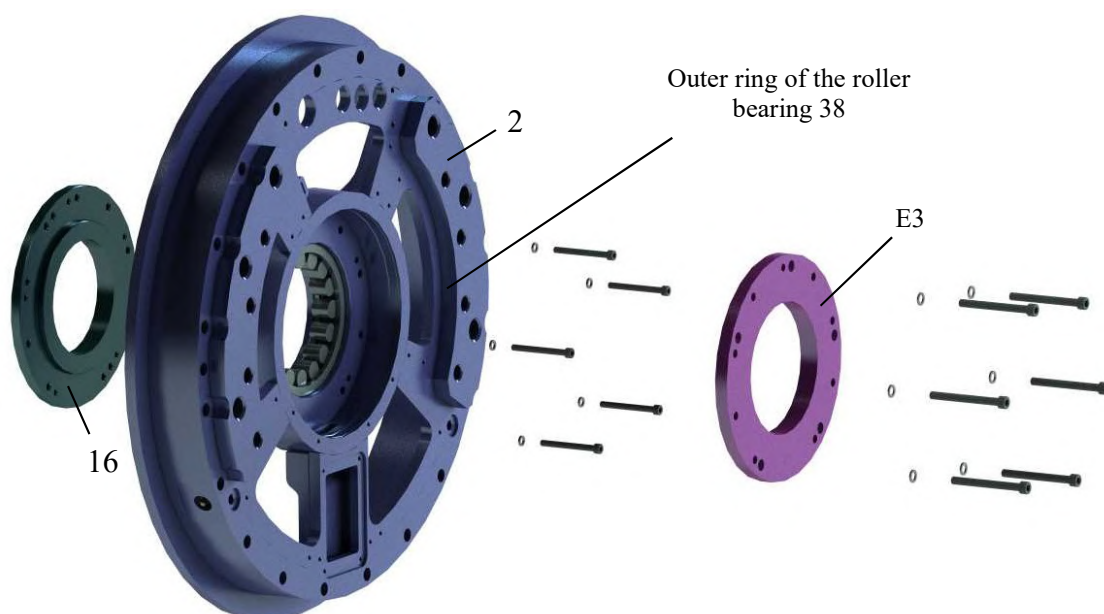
Installation of Male Labyrinth Seal into Bearing Shield on the Brake Side
